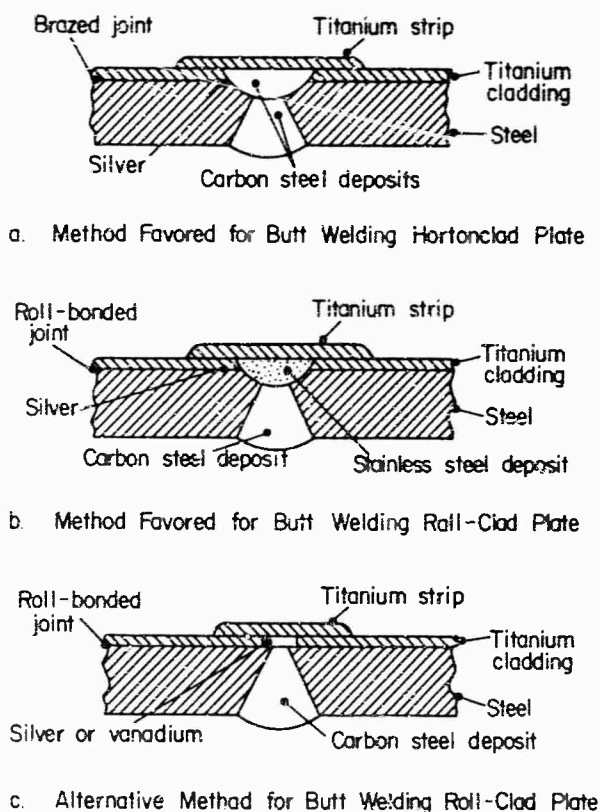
METHODS TO FUSION WELD TITANIUM-CLAD STEEL (67)
